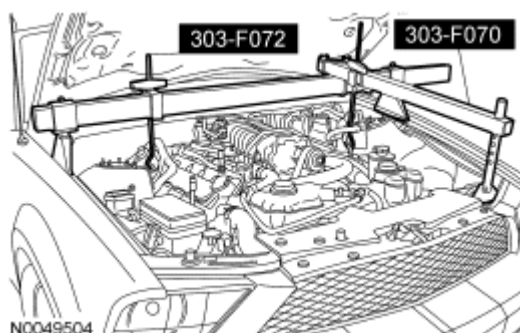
Raising Engine Using Special Tools (303-F072) & (303-F070)
